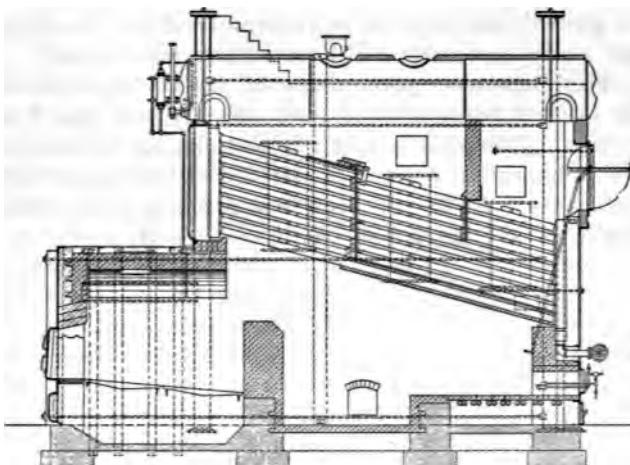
Babcock & Wilcox Boiler with Furnace for Burning Bagasse or Wood with Oil.
